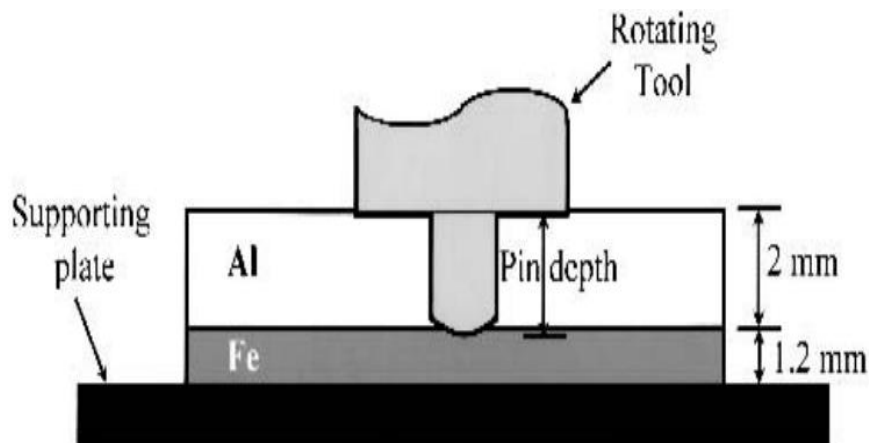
Schematization of the Friction Stir Welding [11].
